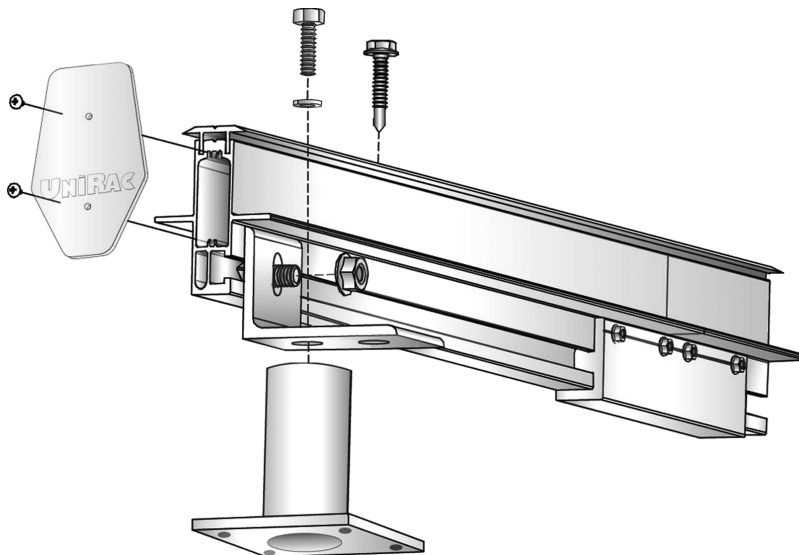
Prefabricated PV module support railing for roof-mount system. *Courtesy of UniRac.
